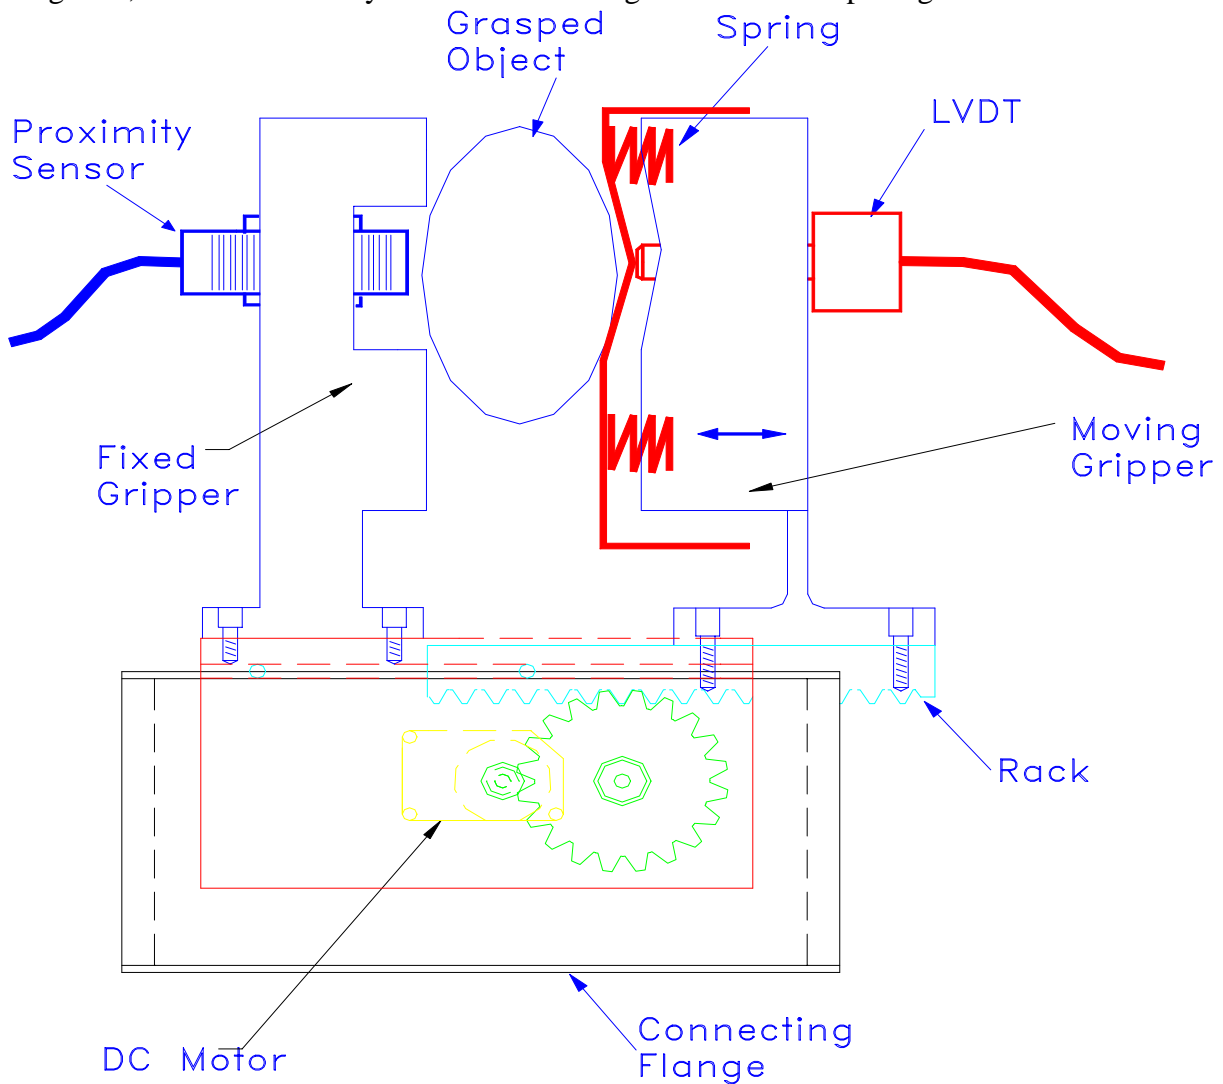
A Gear-And-Rack Gripper With a Sensor On Each Finger.
